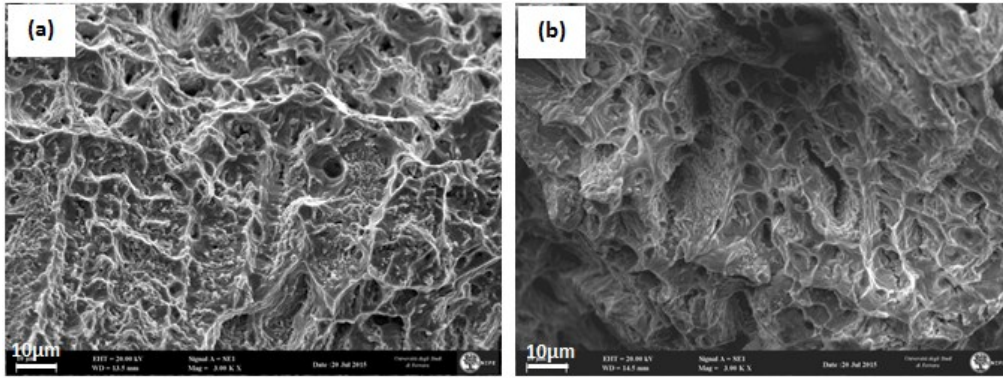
Fracture surface of sample SFNiP
